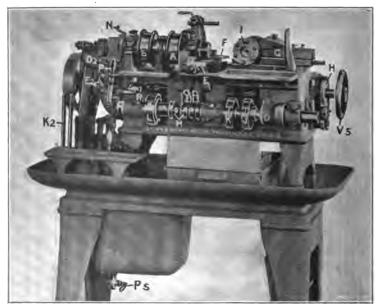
Front View of No. 00 Brown & Sharpe Automatic Screw Machine
